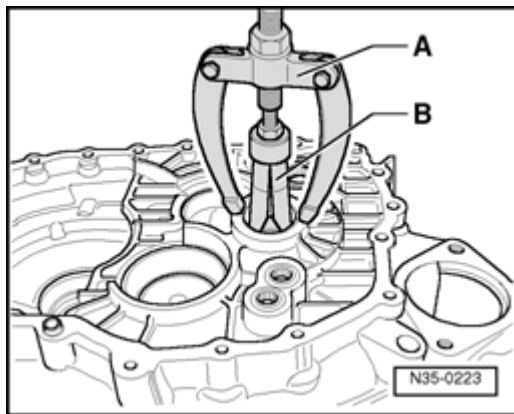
Pulling tapered roller bearing outer race out of transmission housing
